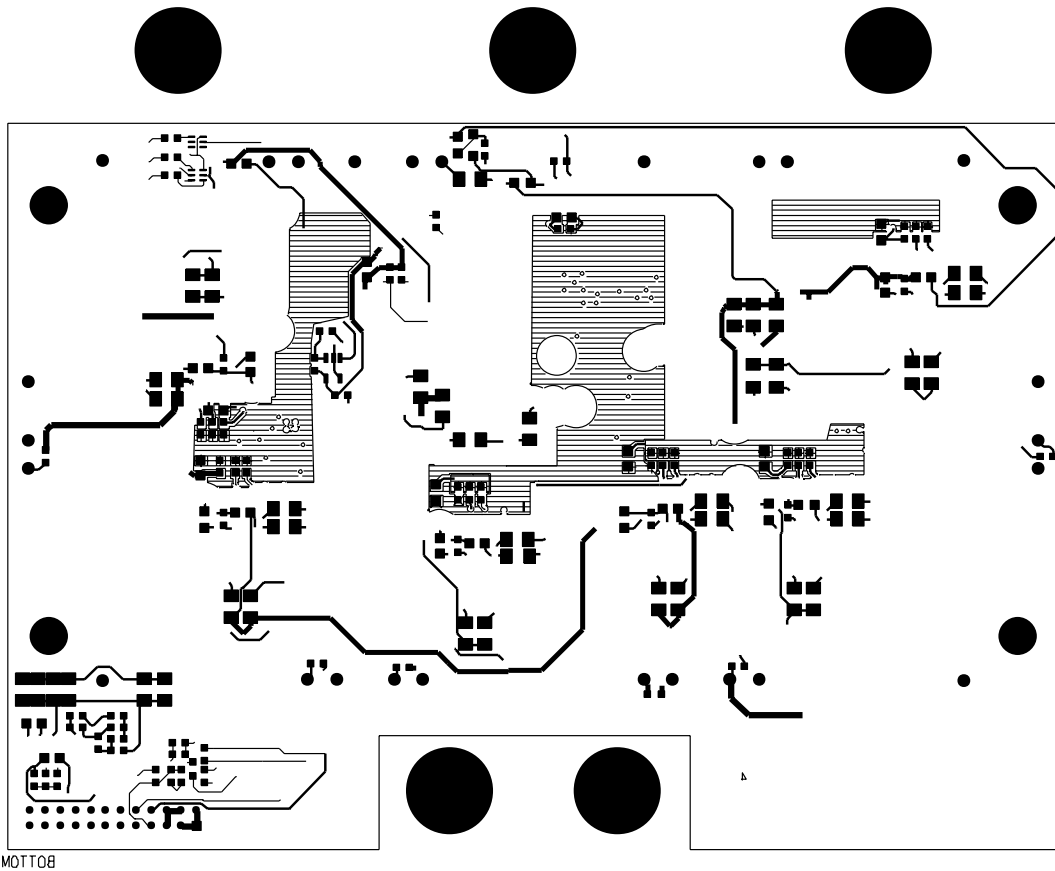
HybridPack1™ IGBT driver – Bottom Layer 4
